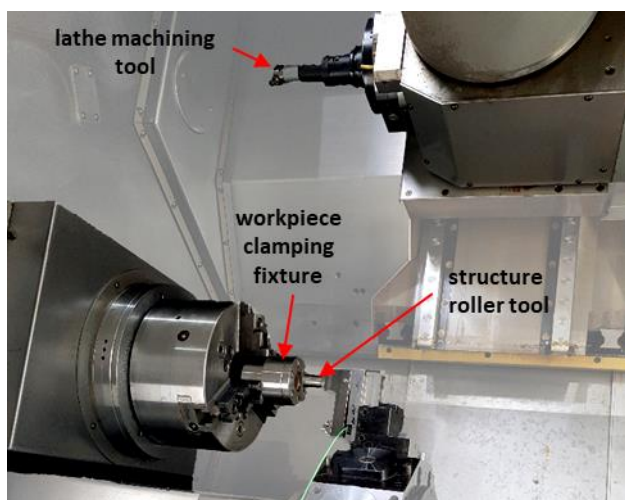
Arrangement of cutting and structure roller tool as well as the workpiece in to the machine
